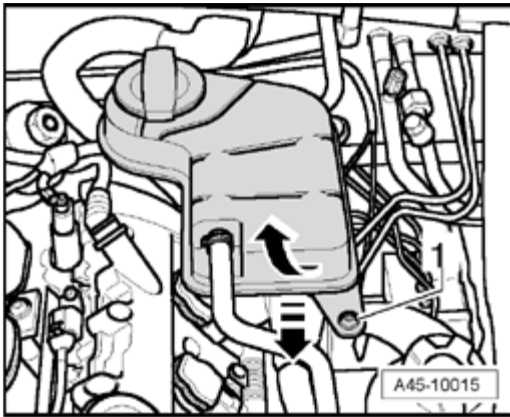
Removing Hex Bolts Securing Coolant Expansion Tank & Disconnecting Connector From Coolant Expansion Tank
